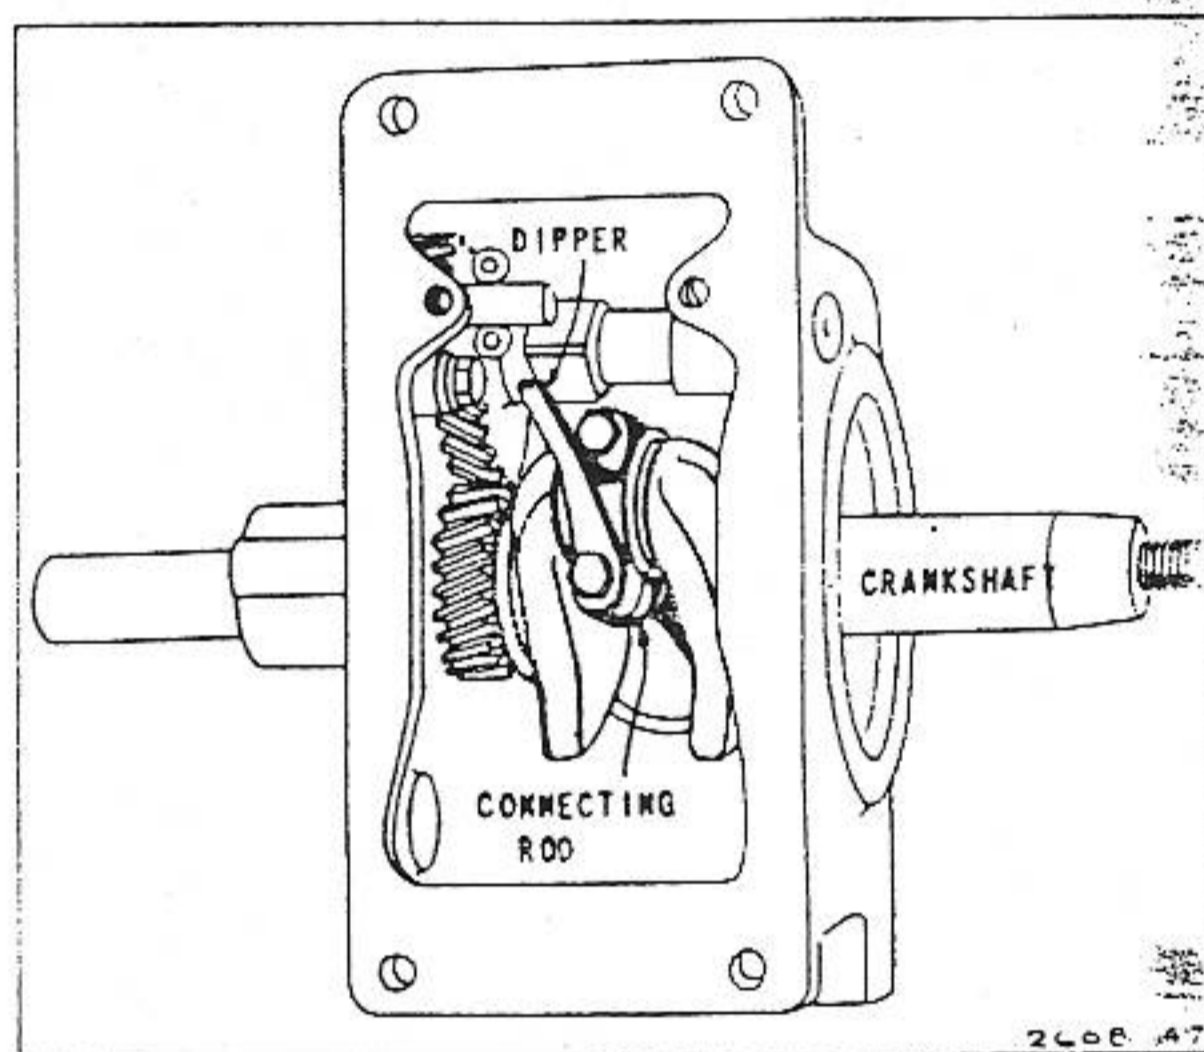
GENERAL VIEW OF ROD ASSEMBLY
